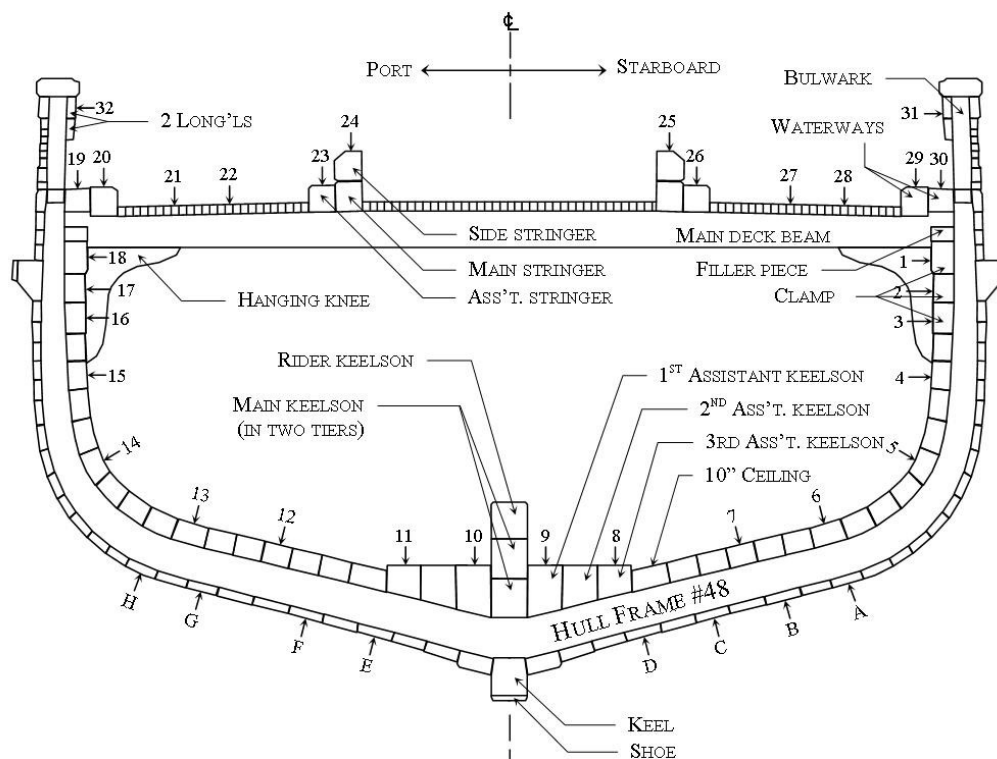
Schematic of drilling locations for the cross-section at frame 48.
